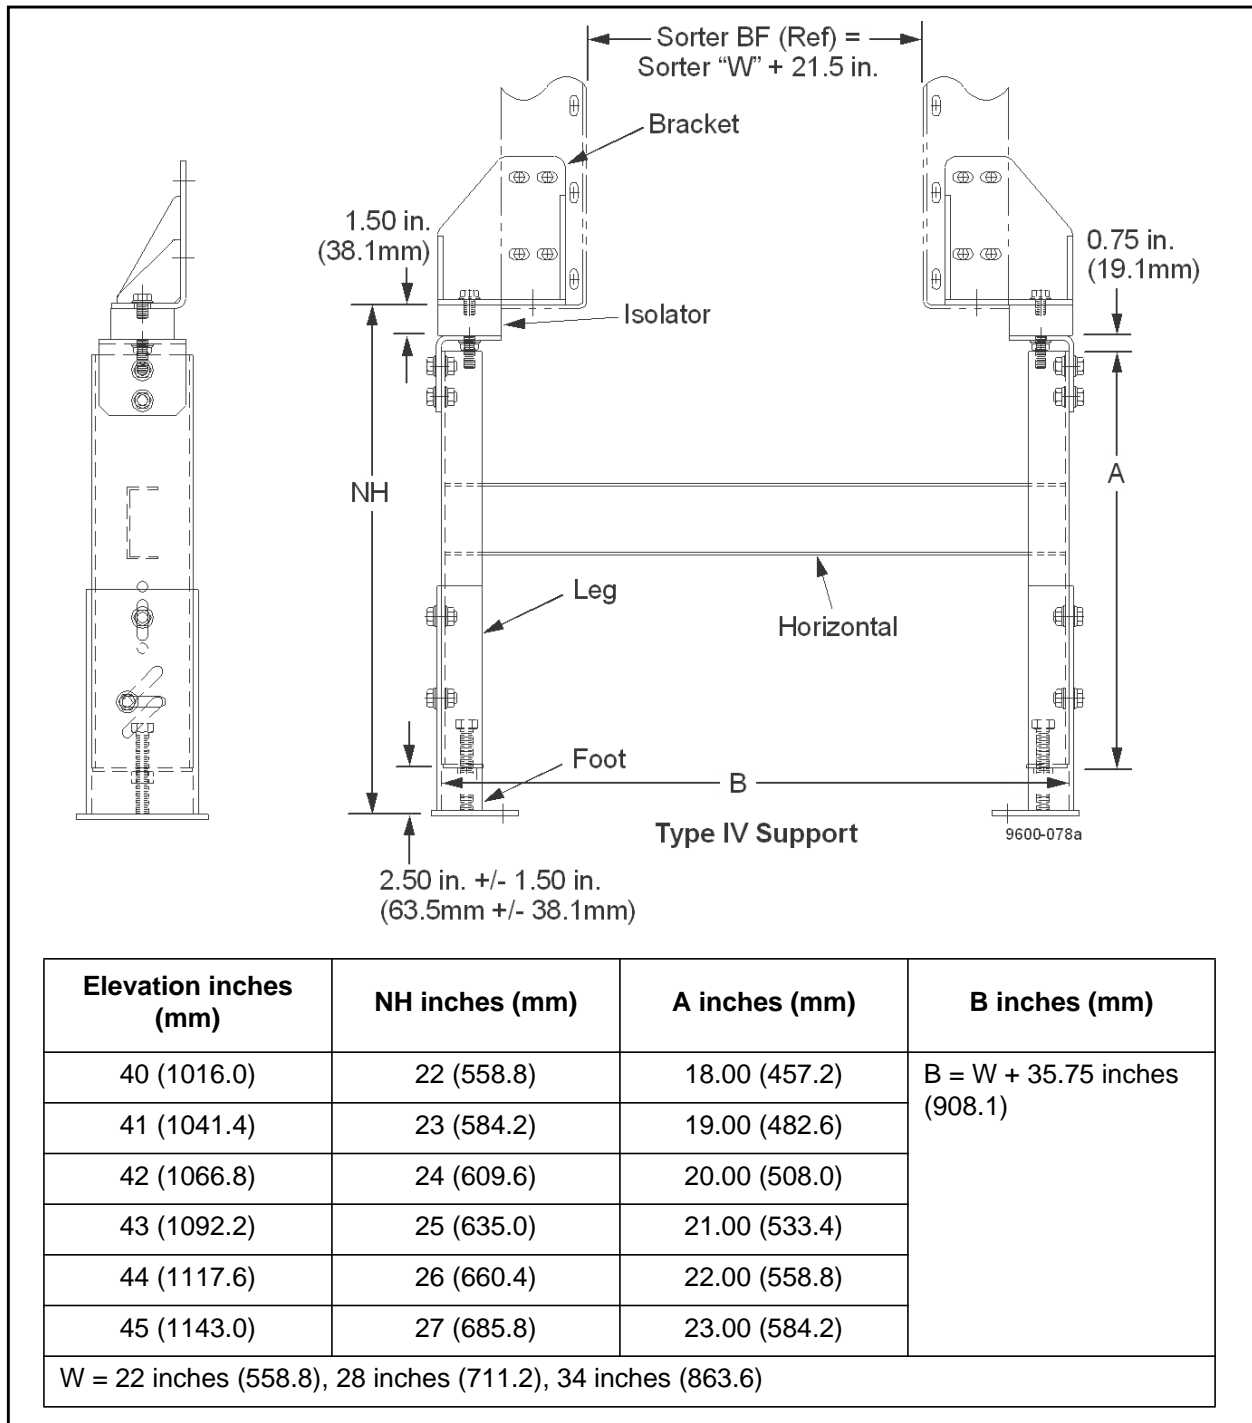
10 Type IV Floor Supports - with 1 Horizontal Brace - Drive Section
